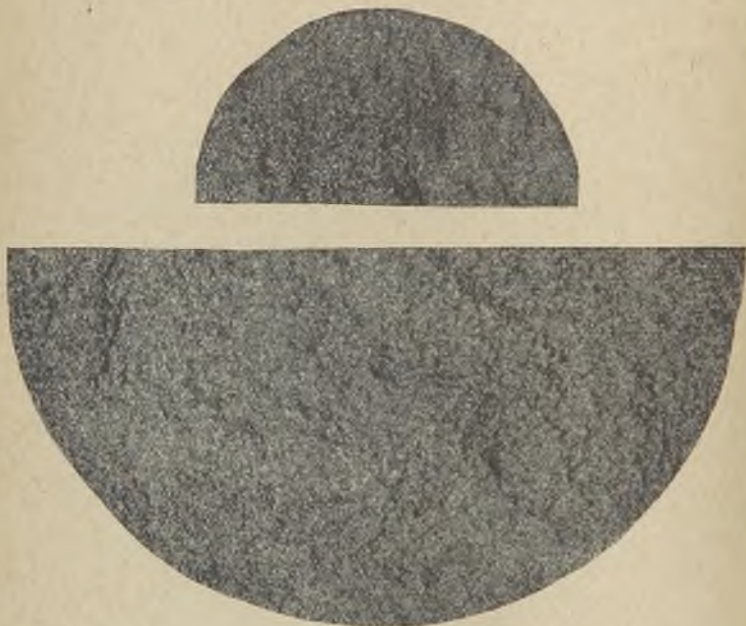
FRACTURES OF RUNNERS TAKEN FROM A STEAM CYLINDER IRON. ALL HAVE BEEN CAST FROM THE SAME IRON. ACTUAL SIZE.
